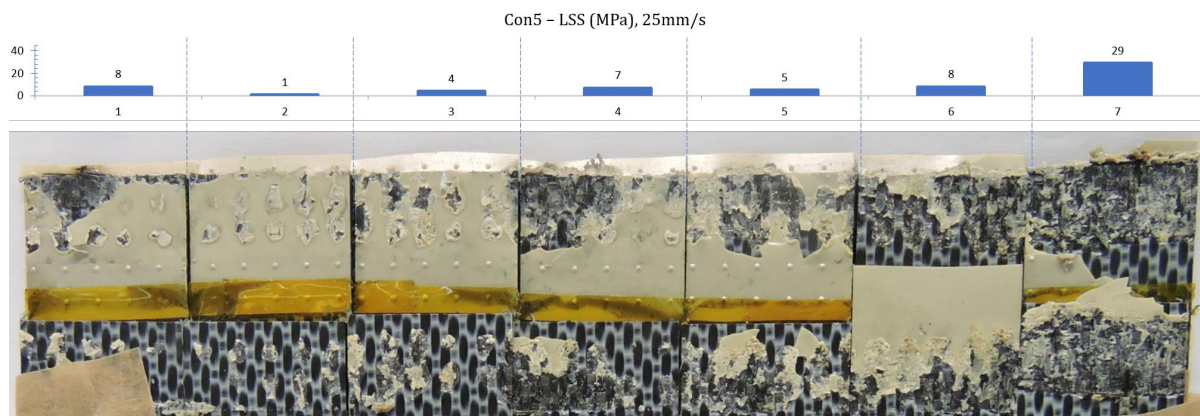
The fracture surfaces at a welding speed of 25mm/s
